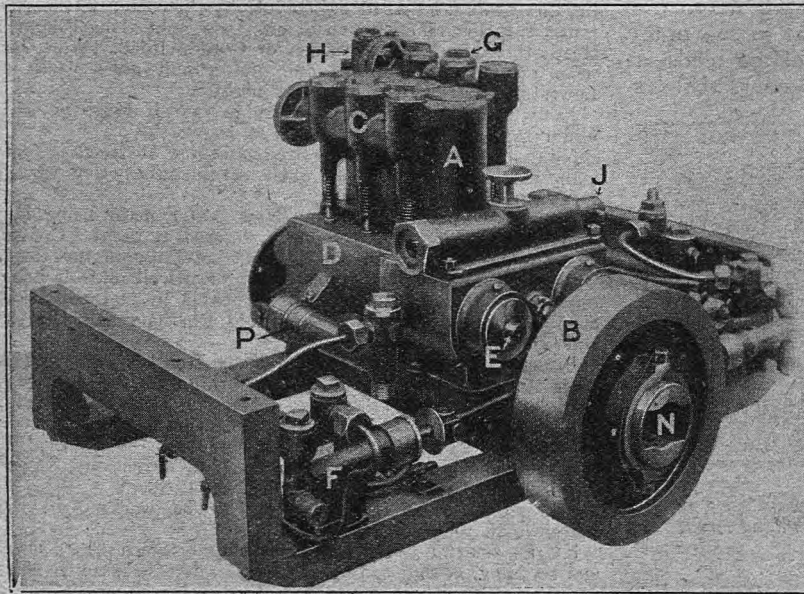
The Pearson-Cox three-cylinder engine on its bedplate.
